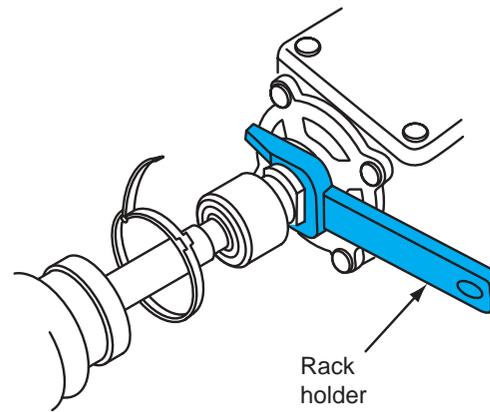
Installing the special tool to hold the shaft screw while tightening the inner tie-rod end.
